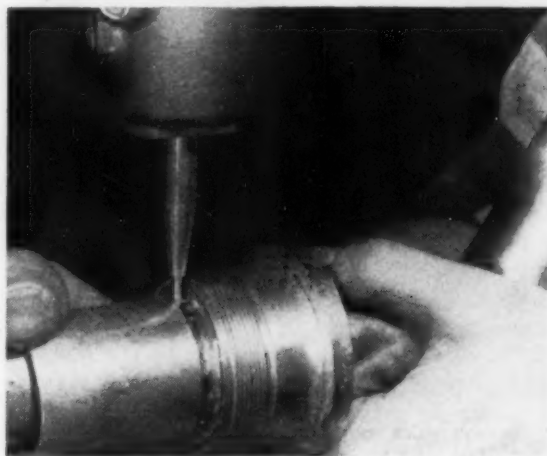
Magnatron circular spring clamp 0.015 in. thick is tacked at four places 90° apart. This joint is later soft-soldered around the tube but no solder is permitted on the spring fingers.
